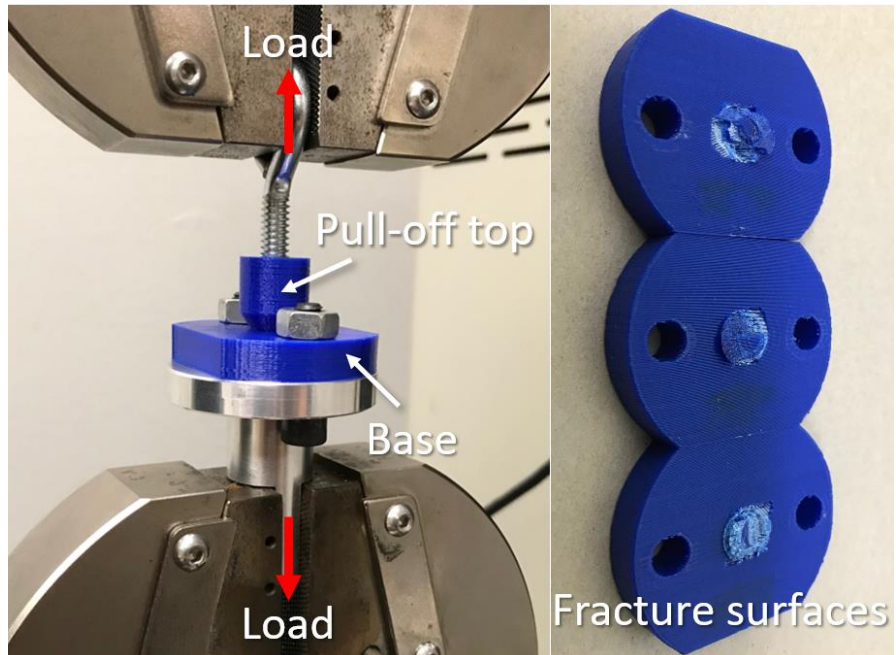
ASTM D4541 bonding test on FFF-printed specimens
